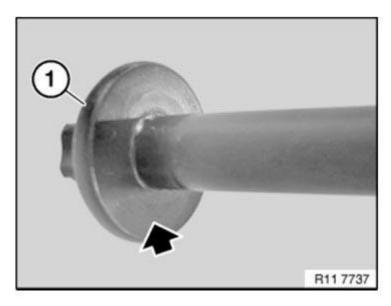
Locating Central Bolt Coating Contact Face Courtesy of BMW OF NORTH AMERICA, INC.
